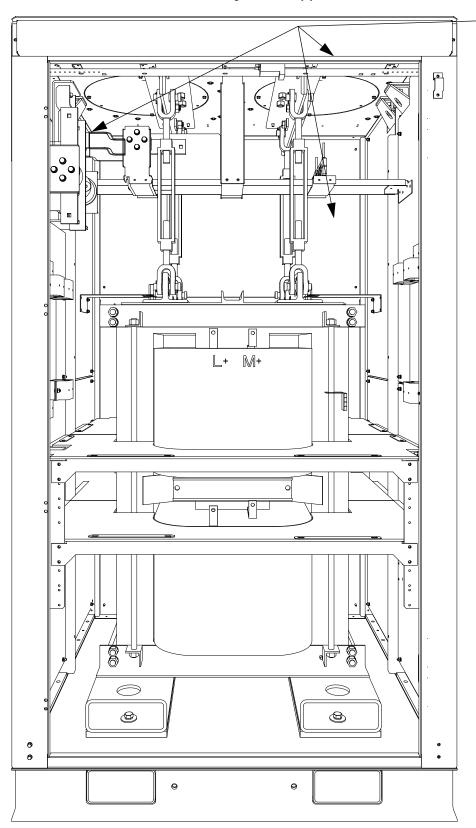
Main and choke sections of 6600V heat pipe drive cabinetry
